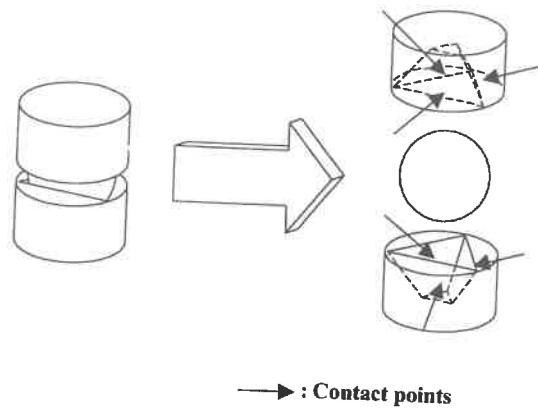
Kinematic coupling of the sensing mechanism. It has six contact points which make the end effect and measuring body constrained exactly.
